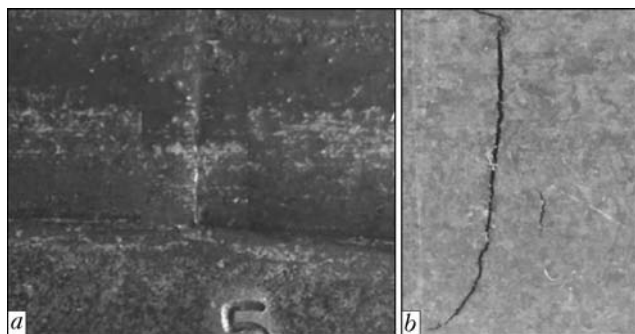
Longitudinal crack in outside weld of pipe from 14KhGS steel caused mainly by force factor: *a* — appearance from side of outside weld; *b* — fracture surface
